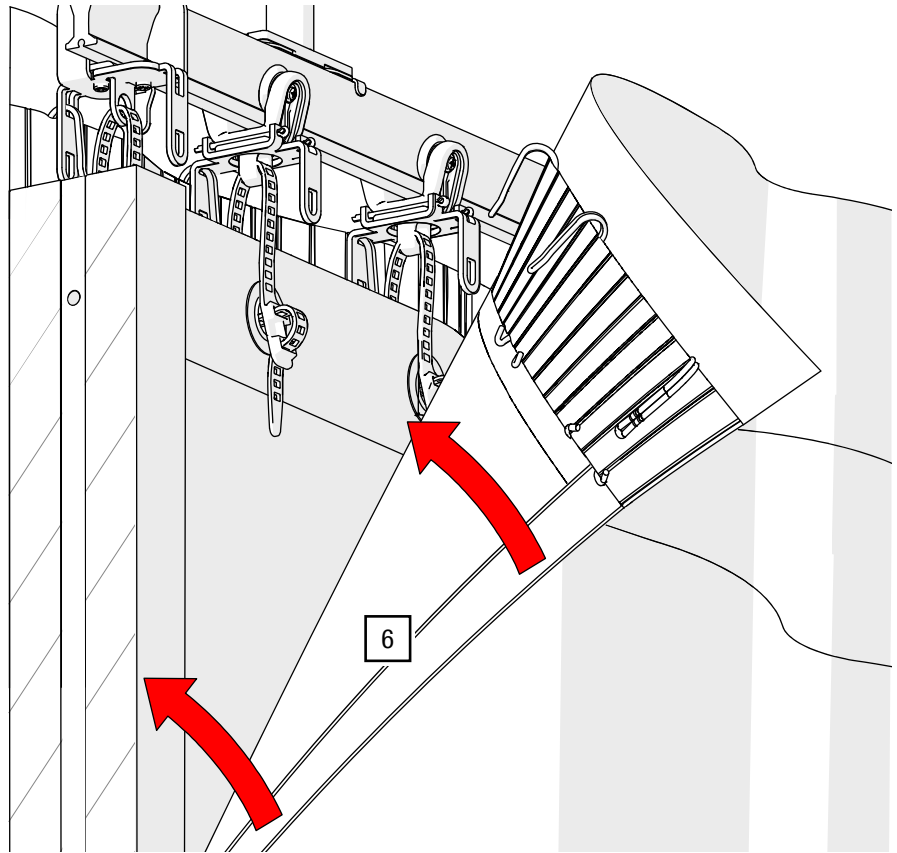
Curtain – Mount with wall connection strip and variable end stop
